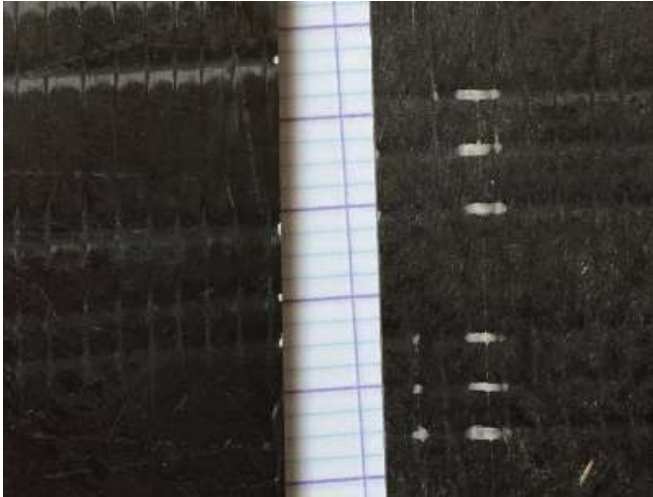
Left: drilled plate, tows and stitches can clearly be seen, right: moulded specimen, tows and stitches are not as clear.
